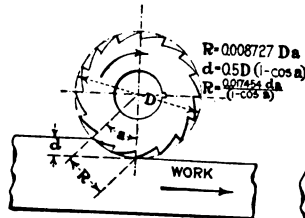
DIAGRAM OF MILLING CUTTER AND WORK
